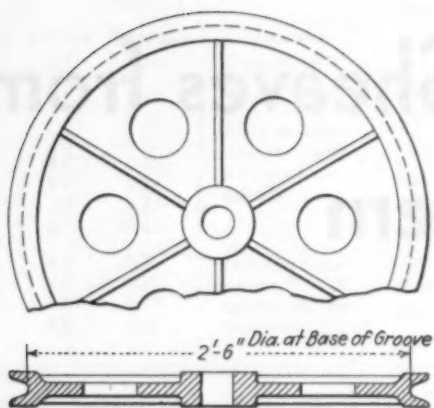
Single grooved semi-steel sheave casting 30 in. in diameter made from a 22-in. pattern.
